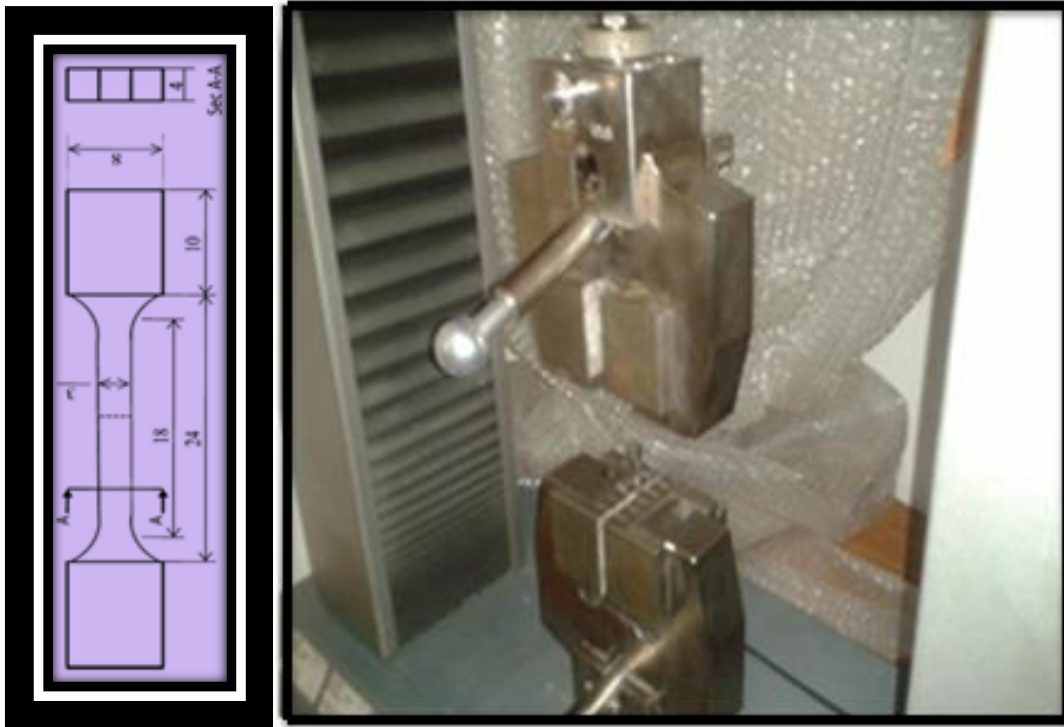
(a) Standard tensile test specimen (all dimensions are in mm) (b) Tensile testing machine (Photo courtesy: Chemical department, TIET Patiala)
